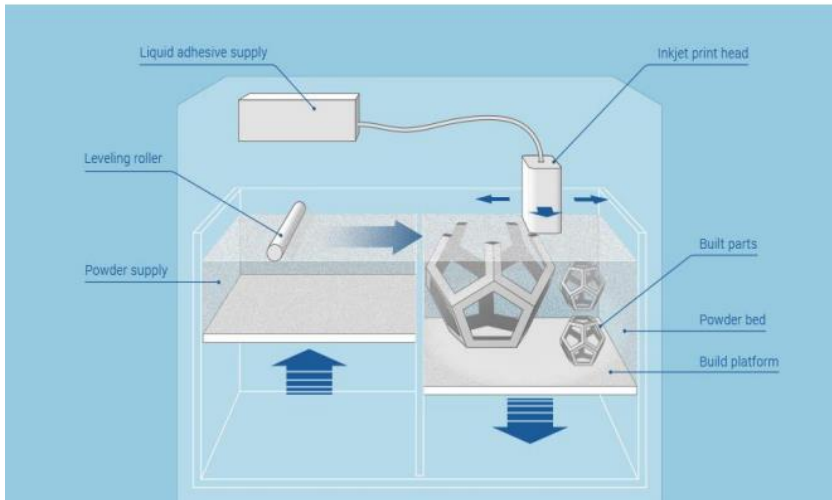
Schematic Representation of the Binder Jetting Additive Manufacturing Machine.
